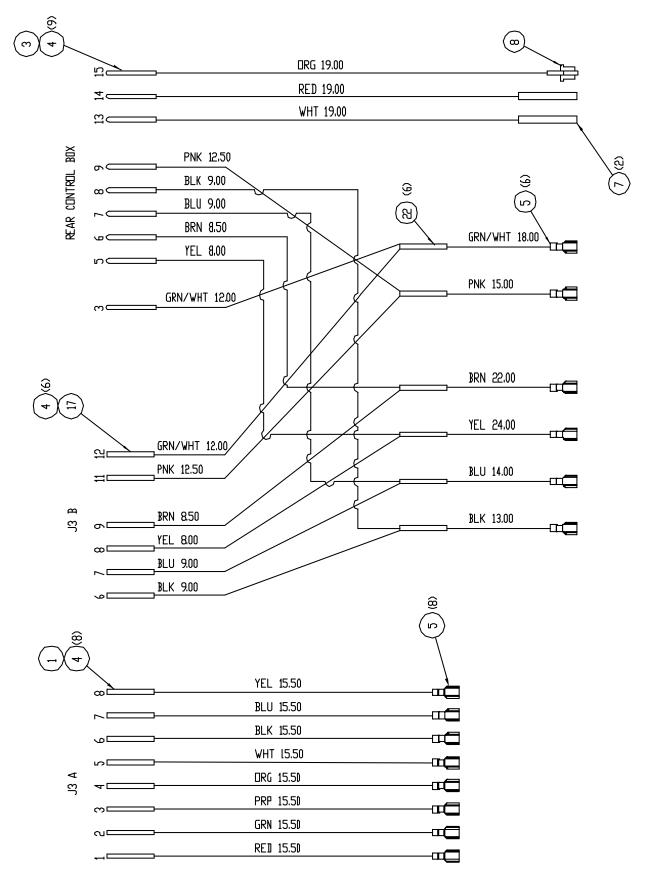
WIRE HARNESS, VALVE BOX (SHEET 2 OF 2)
